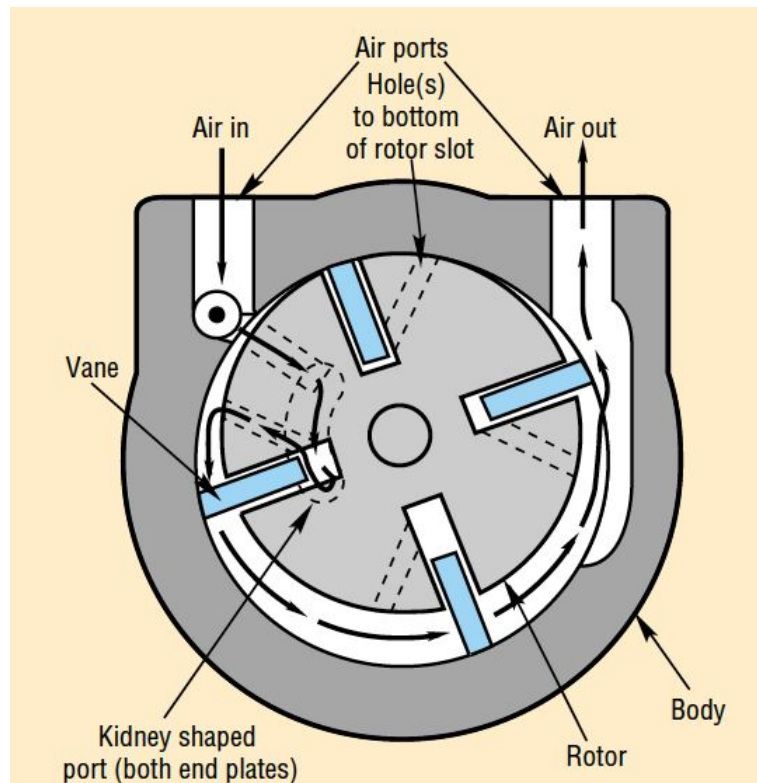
Cutaway view of a rotary vane air motor (*Air Motor Selection and Sizing* 2012)
